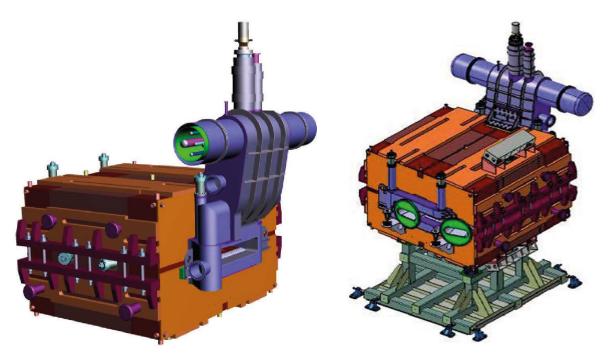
Left: Technical design of the Super FRS standard superconducting dipole. Right: Technical design of the Super FRS branched superdonducting dipoles
